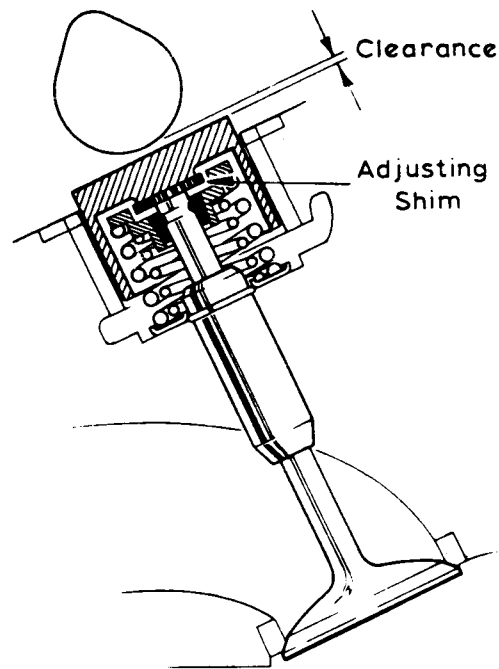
VALVE ADJUSTMENT TD 50-4E
